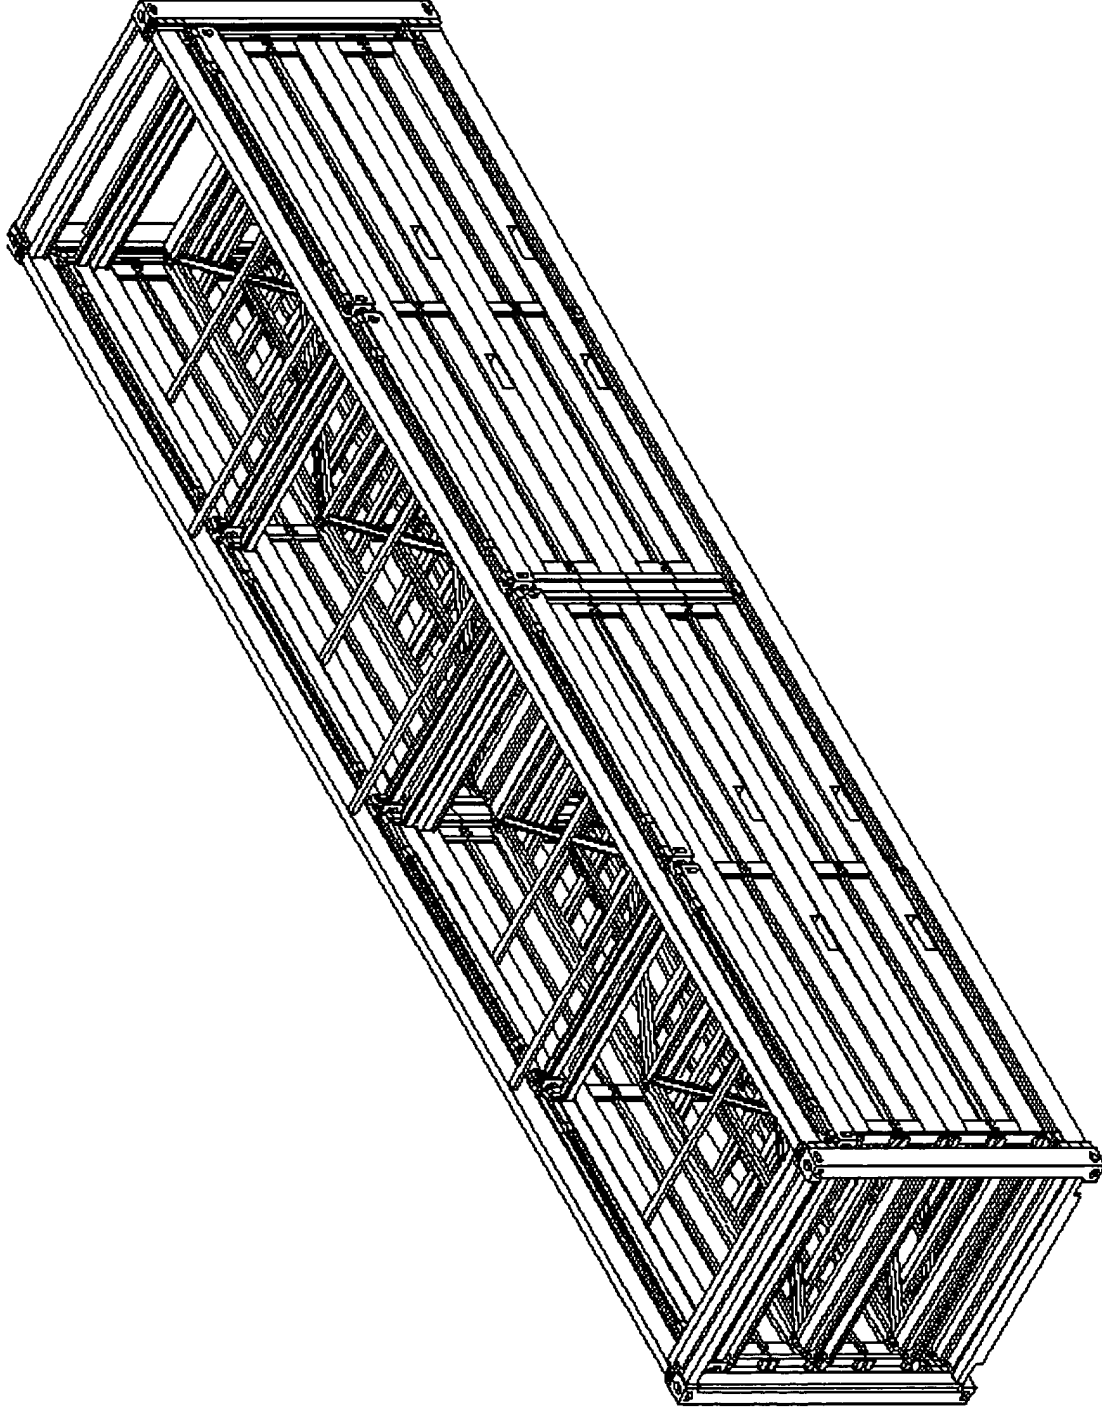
D: Step7 of disassemble and load process: The ceiling frame of the 40 foot shipping collapsible cargo container is assembled.
